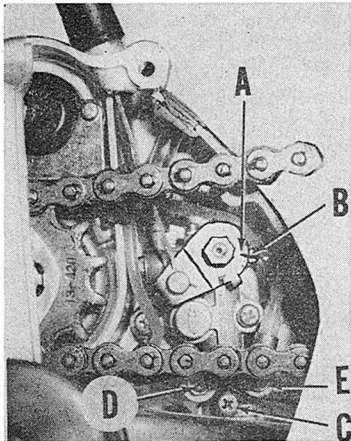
Marks on pump control arm and pump body (A&B) should align at full throttle position.
